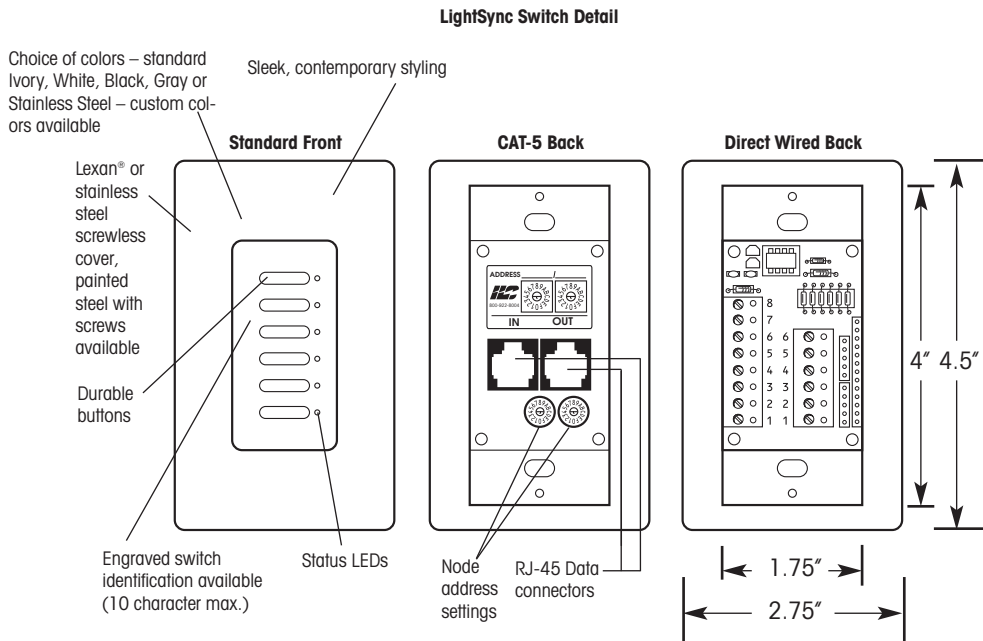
LightSync™ Switch and G2 Switch Detail
